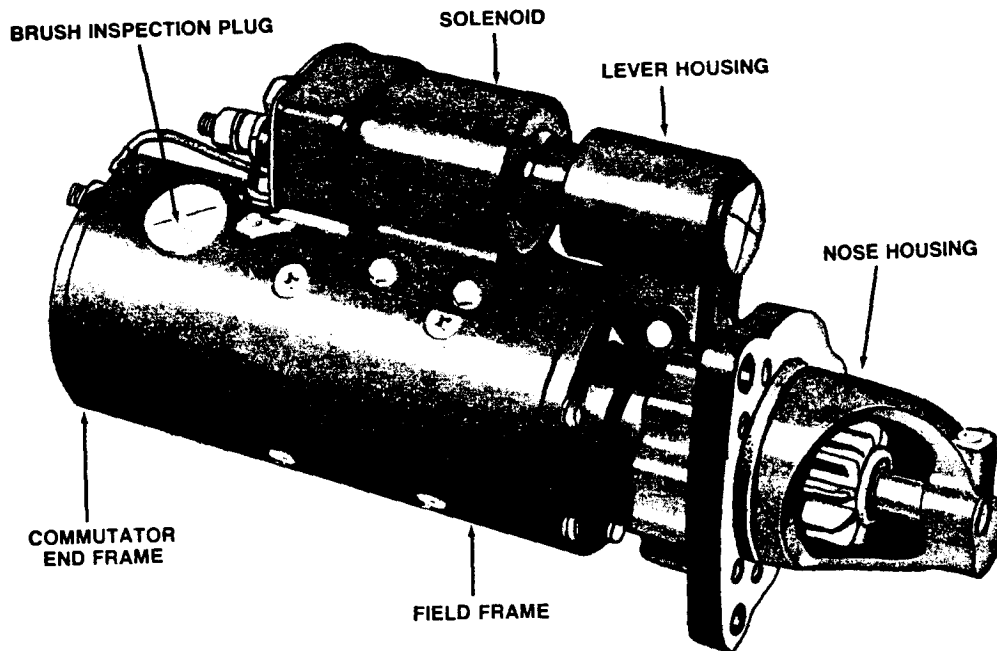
Typical 50-MT Series heavy duty cranking motor.
